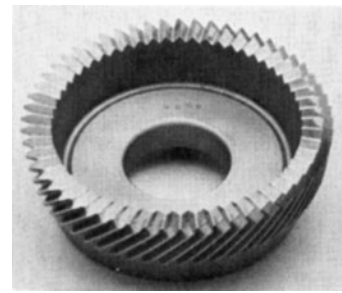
Helical gear cutters for all but low helix angles are sharpened in the normal section. (Courtesy of Fellows Corp., Emhart Machinery Group, Springfield, Vermont.)
